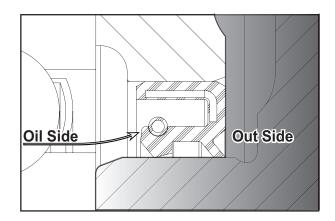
Lubricate and fit the sealing ring (14) into the cover.
